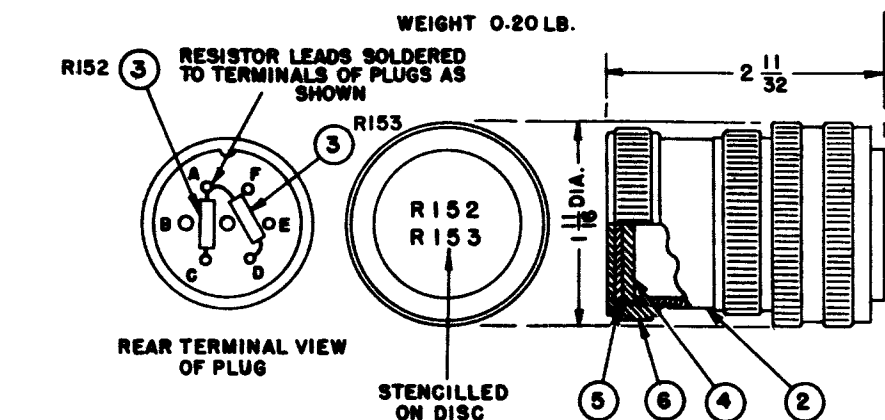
Automatic Pilot Cable W505, Outline-Assembly (T-256282)
